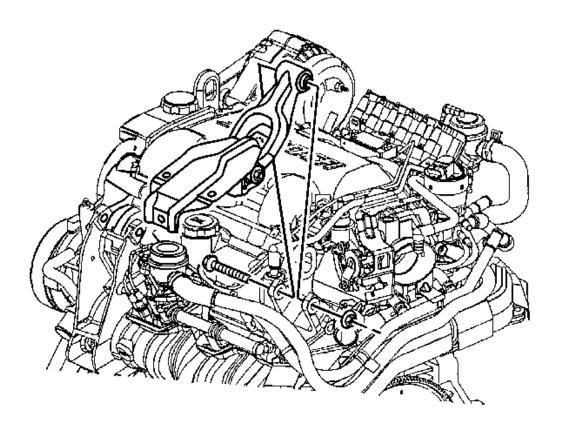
Installing Engine Mount Strut - Left Courtesy of GENERAL MOTORS CORP.
